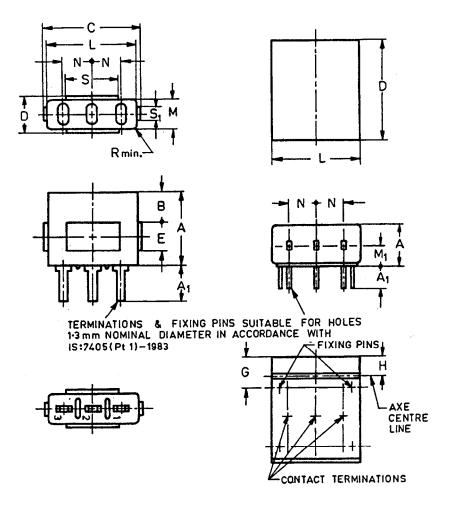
Socket for Standing-on-board Mounting — 13984 IS — S102
